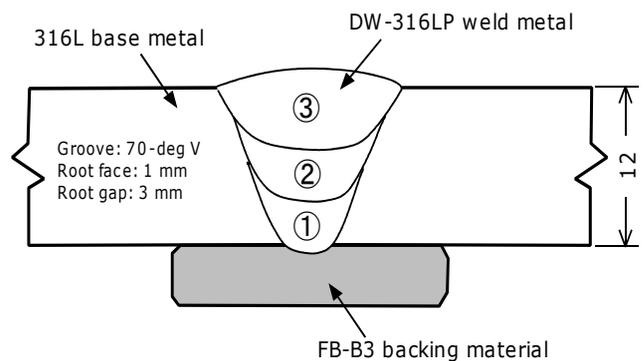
An example of the welding procedure with DW-316LP for the storage tank of a chemical tanker, a one-sided welding procedure using a FB-B3 refractory backing for the root pass in vertical-up position.
